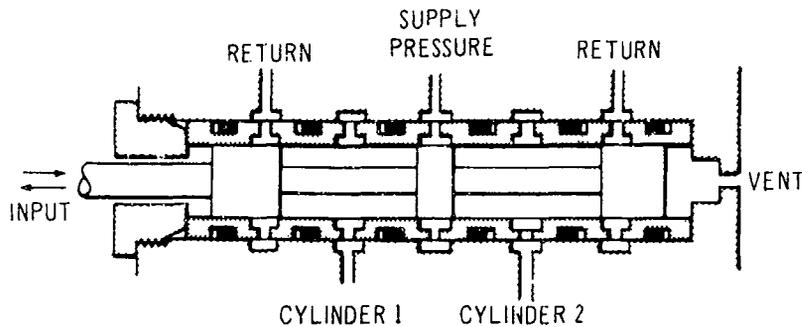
Control Valve Spool and Sleeve Arrangement
